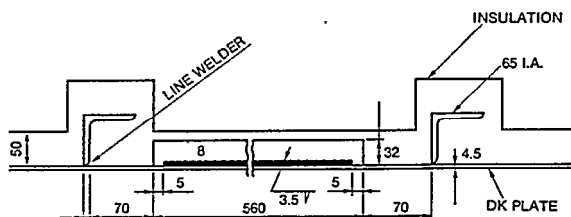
FLAT BAR INSTALLATION DETAIL
